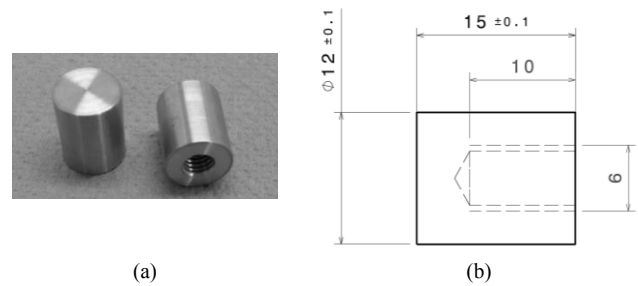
(a) PECM tool samples with detachable design, (b) detailed dimensions of the samples.
